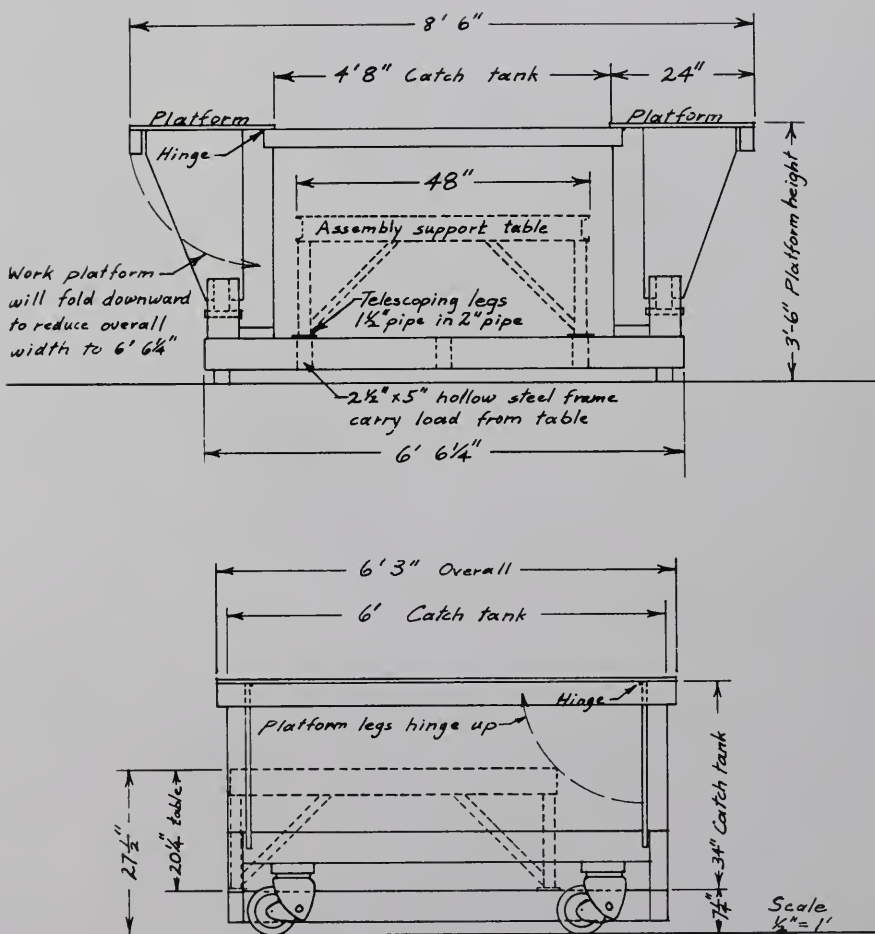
Catch Tank and Support Structure for the Subcritical Assembly.
